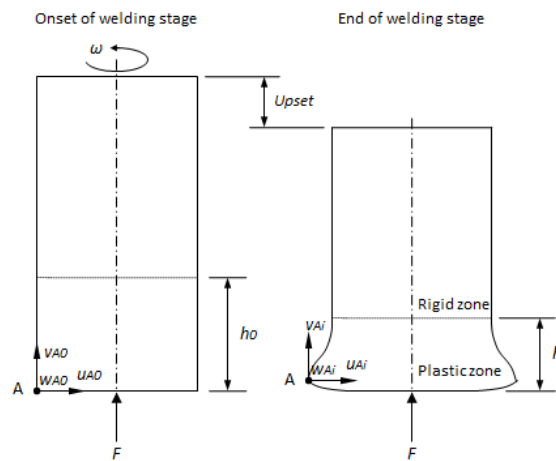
Appearance of the pre-weld workpiece (left) and at the end of the welding stage (right). Based on (Rich, 1971).
